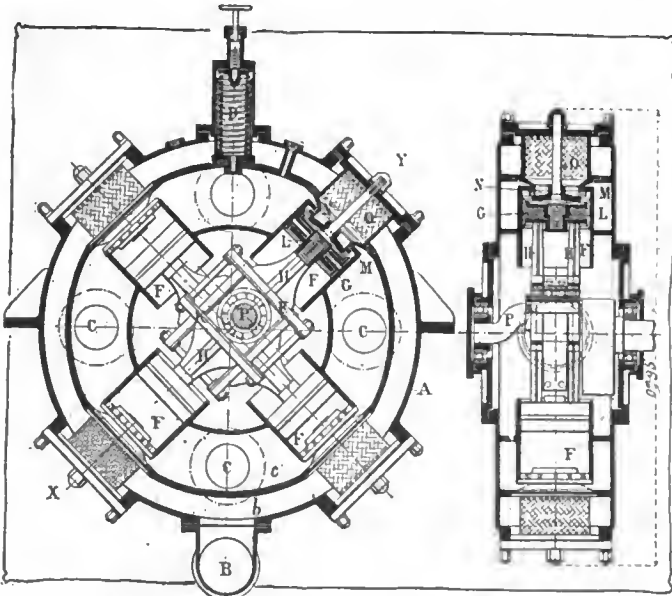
Vertical section of Drouville, four-barrel piston pump for fire engines. Fig. 4—Section on line XY of Fig. 3
